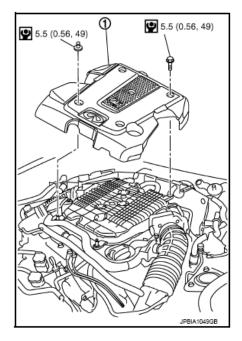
Identifying Engine Cover With Torque Specifications Courtesy of NISSAN MOTOR CO., U.S.A.
